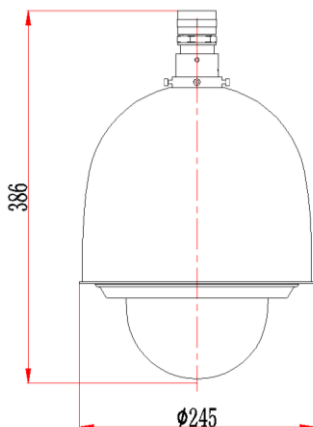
Dimensions of DC-□ Explosion-proof Speed Dome Camera
